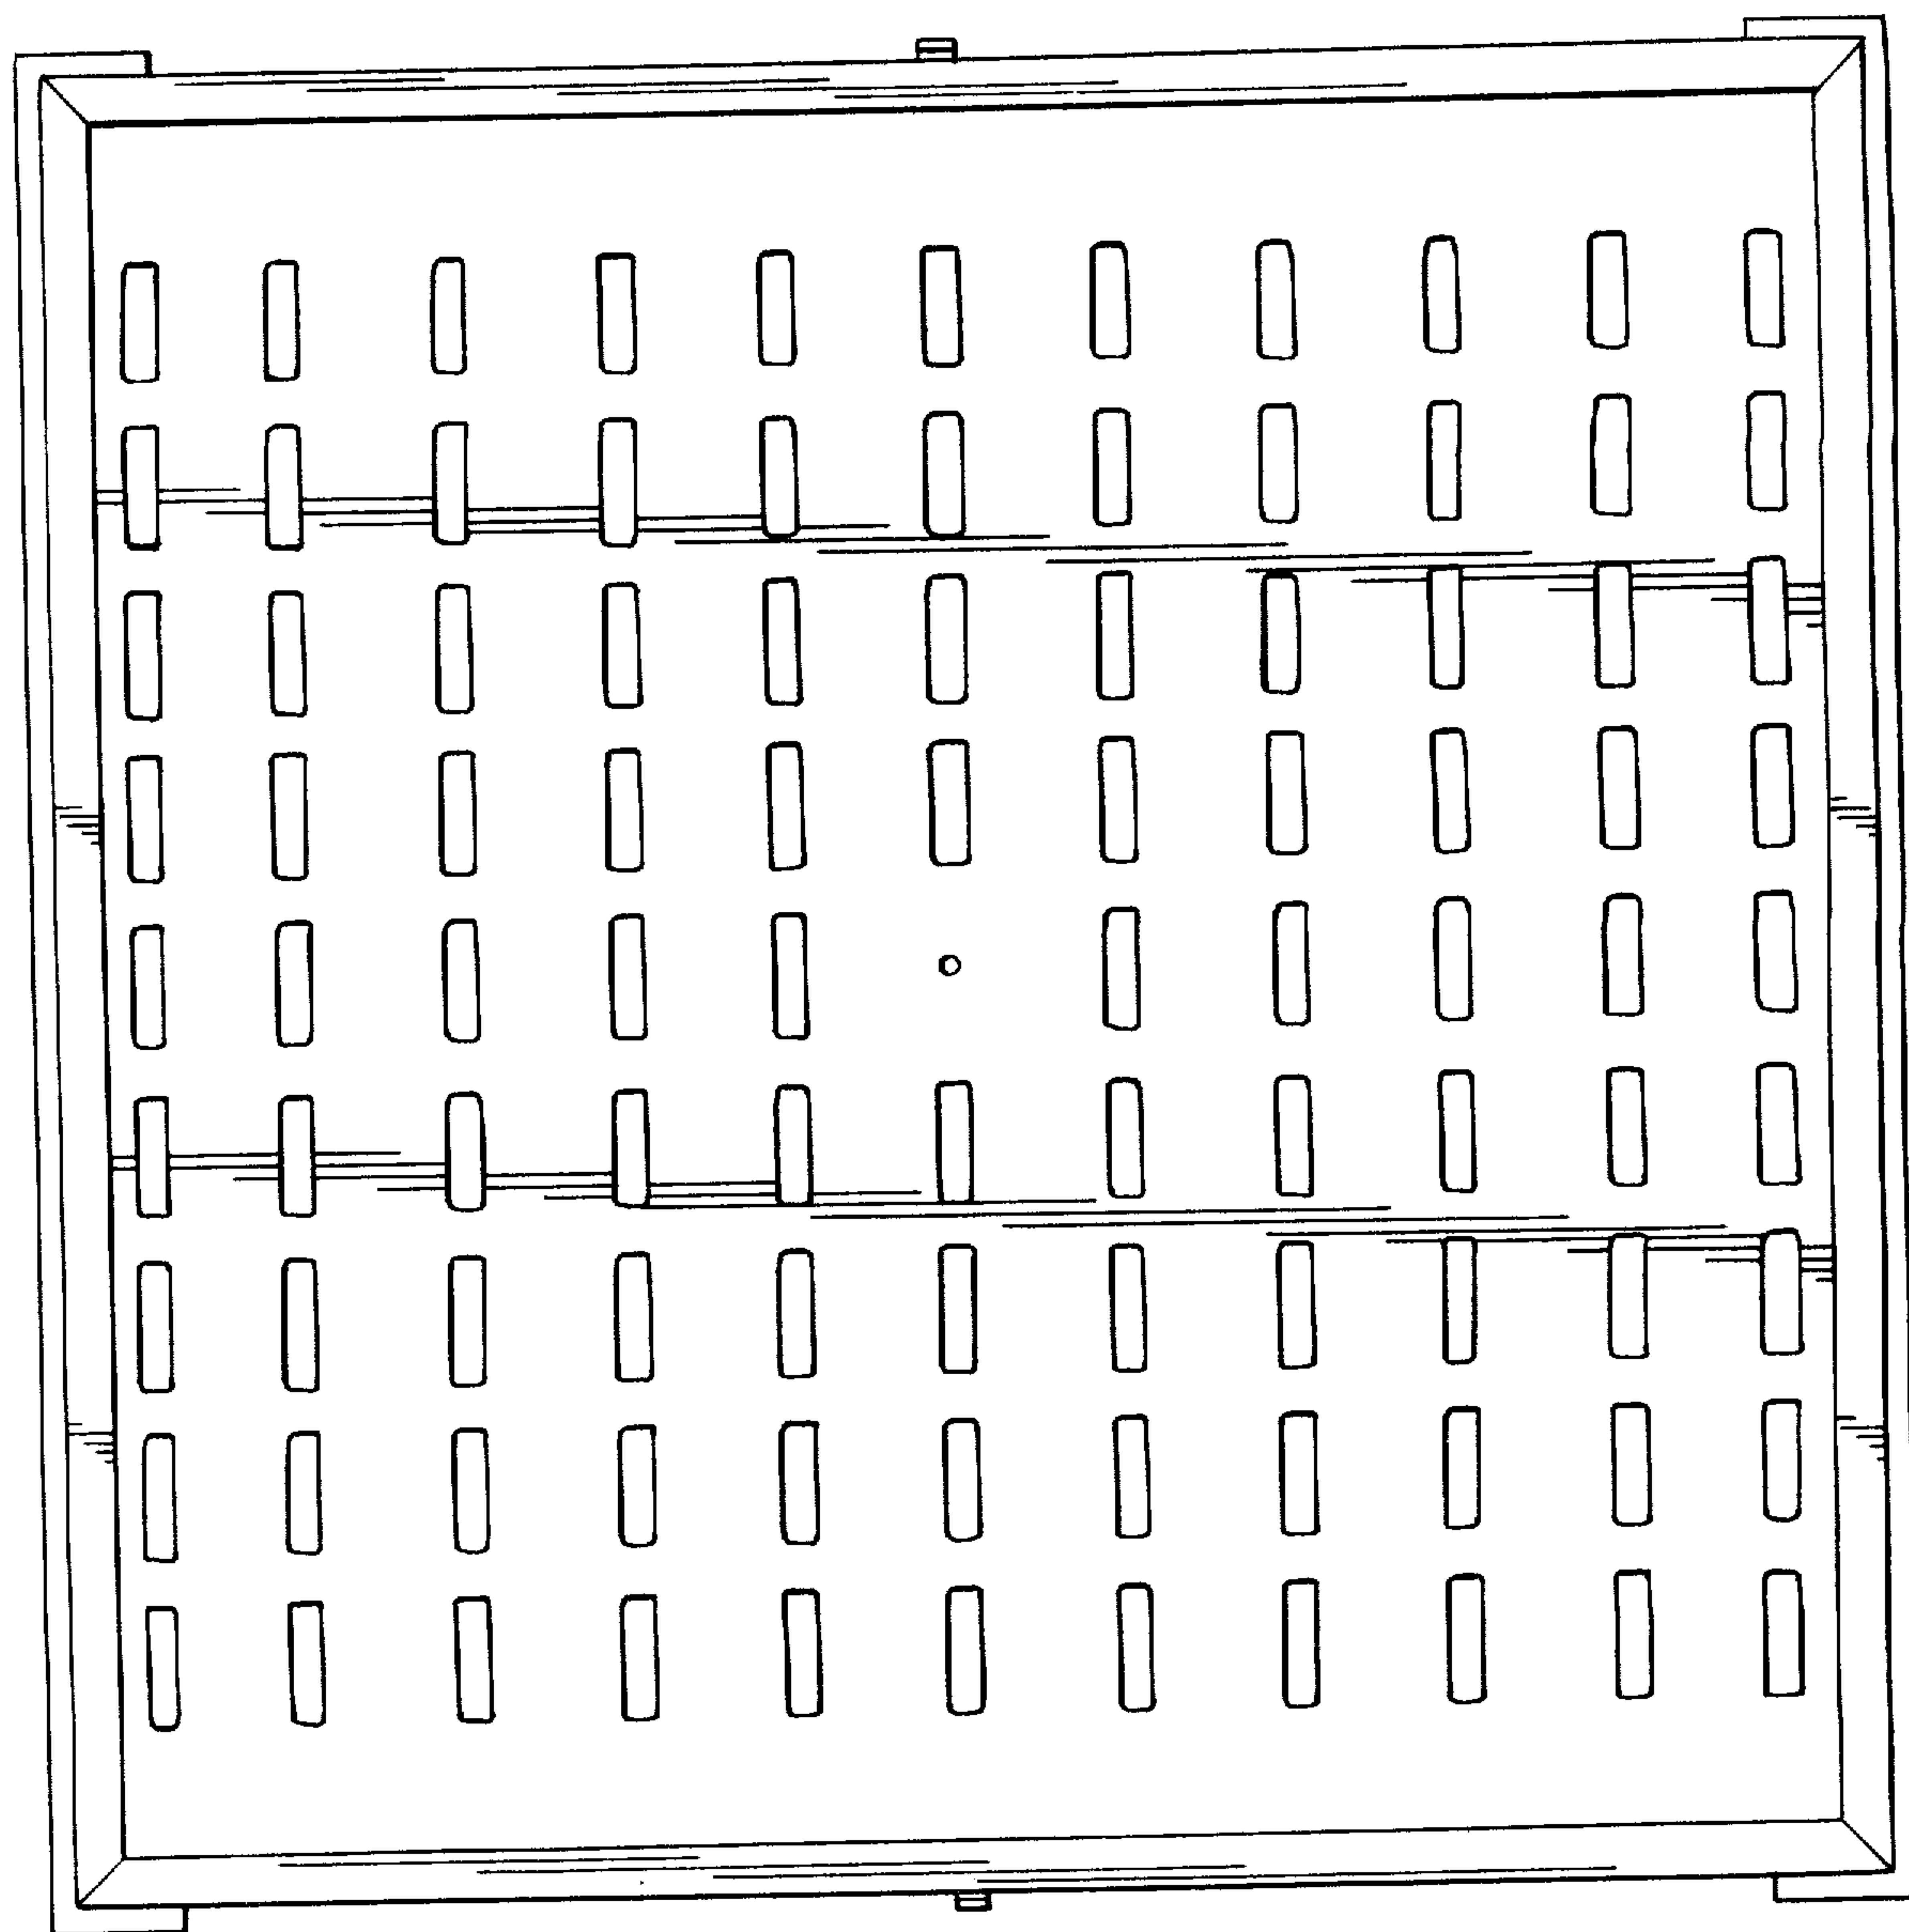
is an elevational view showing the inside surface of the four side panels used in the box;
